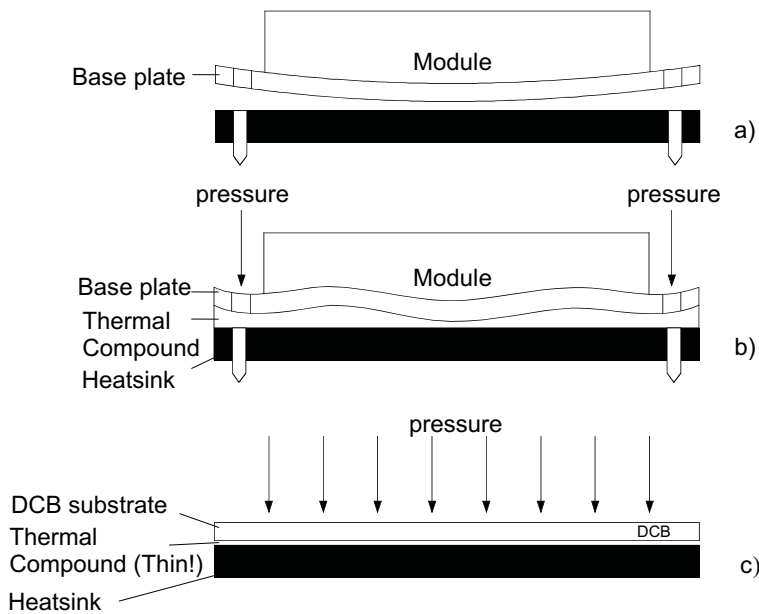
Problems arising through contact of power module to heat sink
